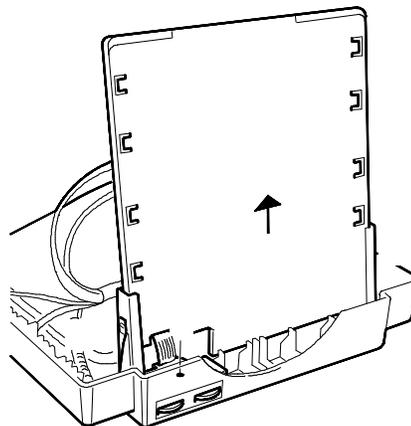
Removing the metal shield that covers the soldered side of the main board
